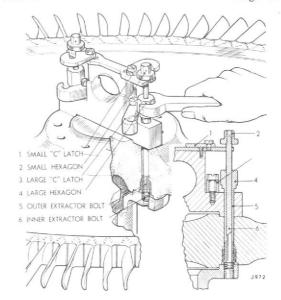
Removing turbine disc with combined lifting and extracting fixture T.74810.
